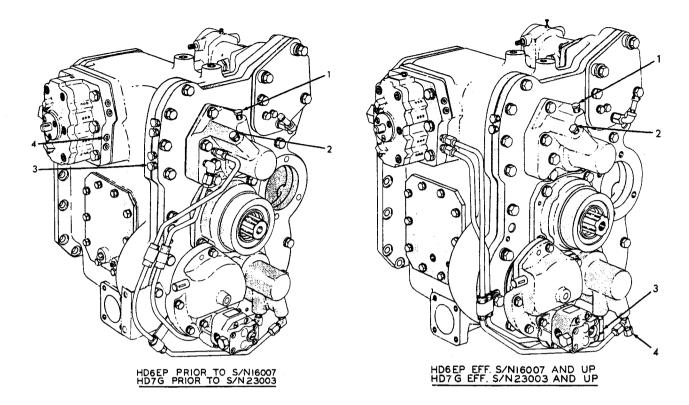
Transmission Pressure Check Points (T-70916 & T-70917)
